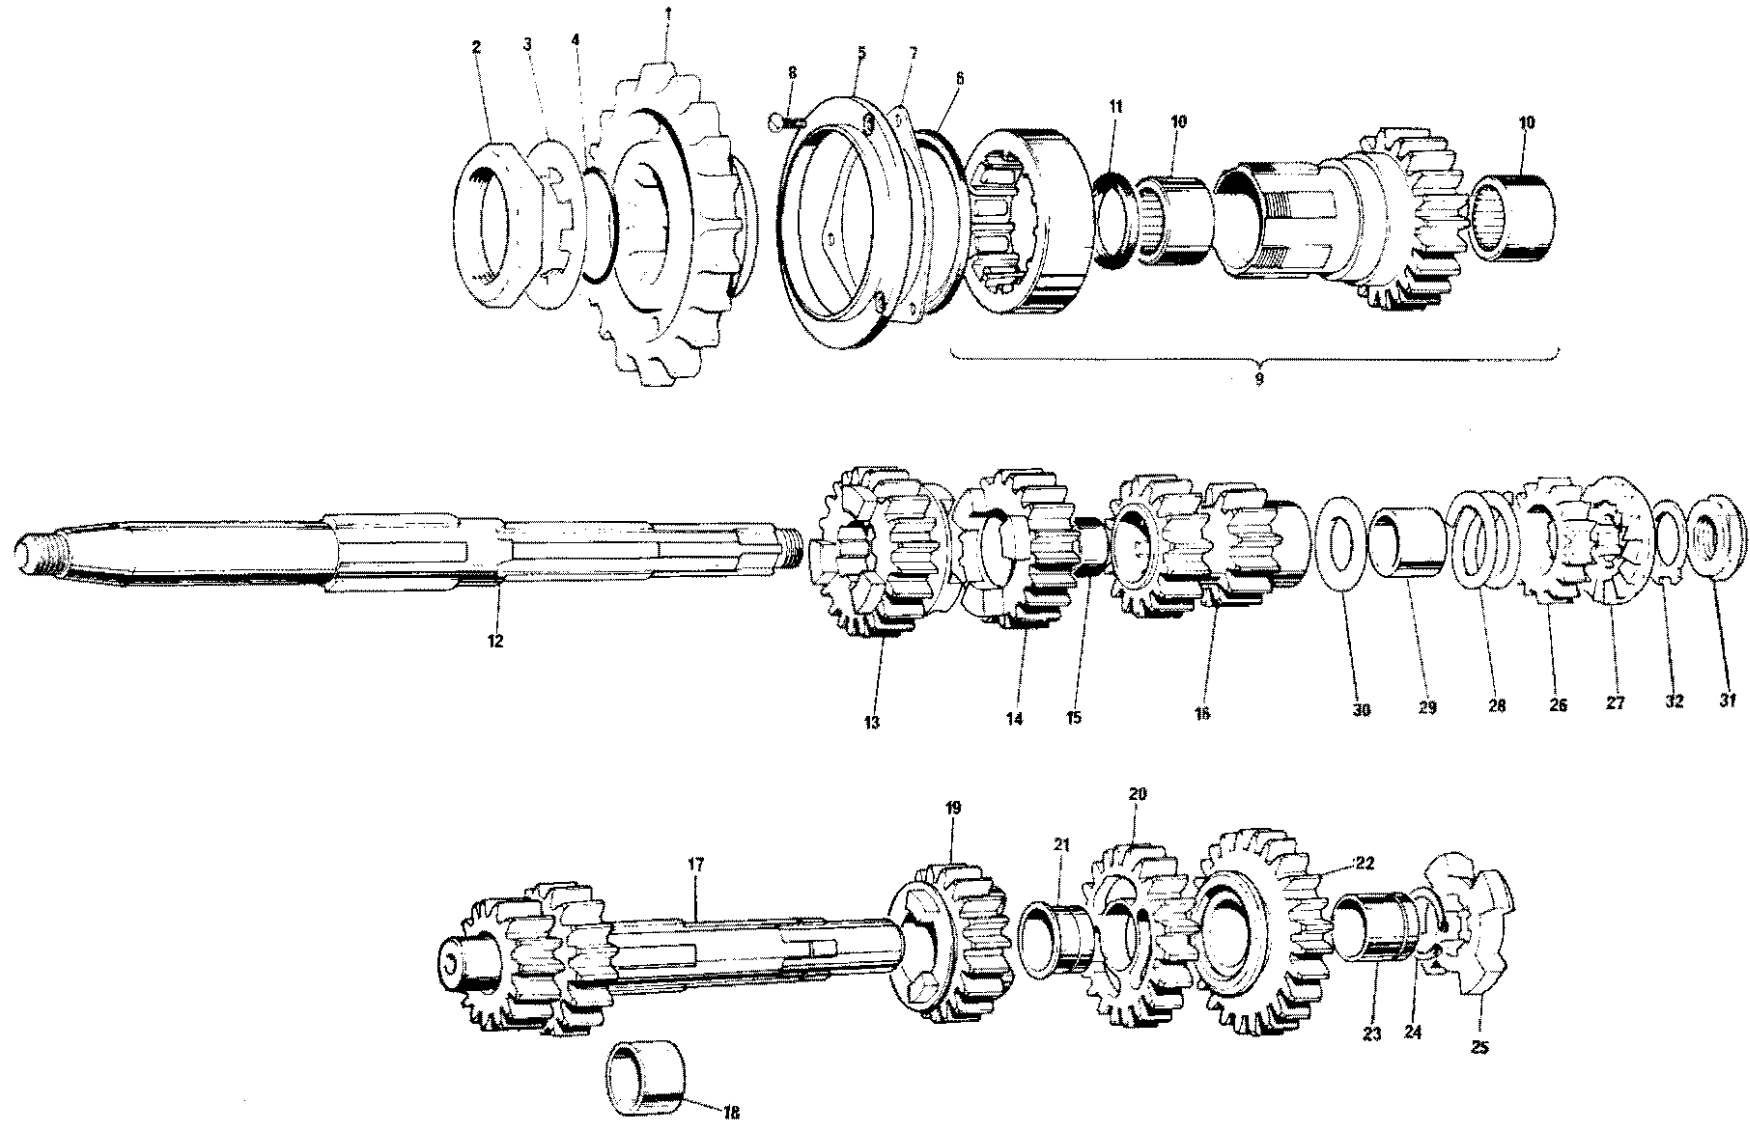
TRANSMISSION (GEARBOX) SHAFTS AND GEARS
